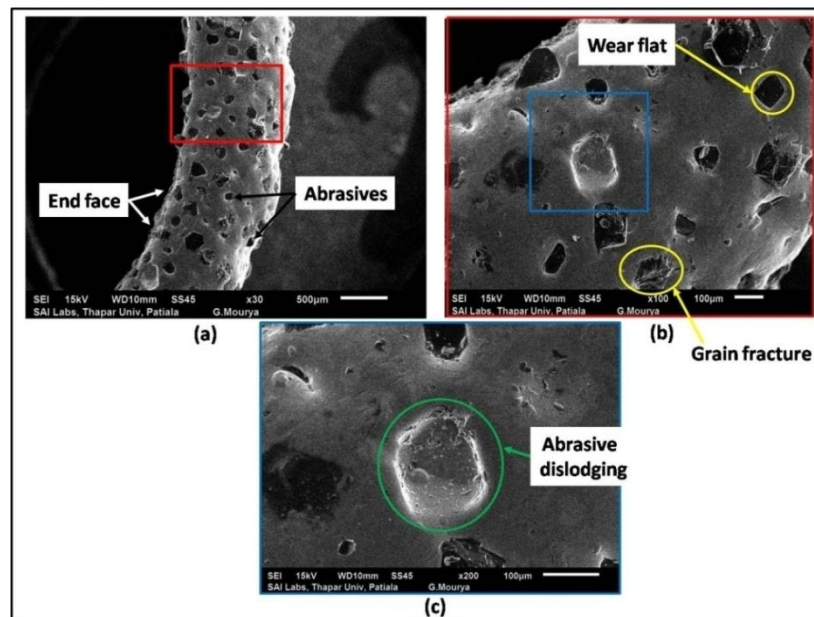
Microscopic images showing tool wear with different magnification after drilling holes by RUD process. (a) End face of Hollow abrasive tool. (b) Magnified image of hollow tool depicting grain fracture. (c) Tool image showing abrasive dislodging
